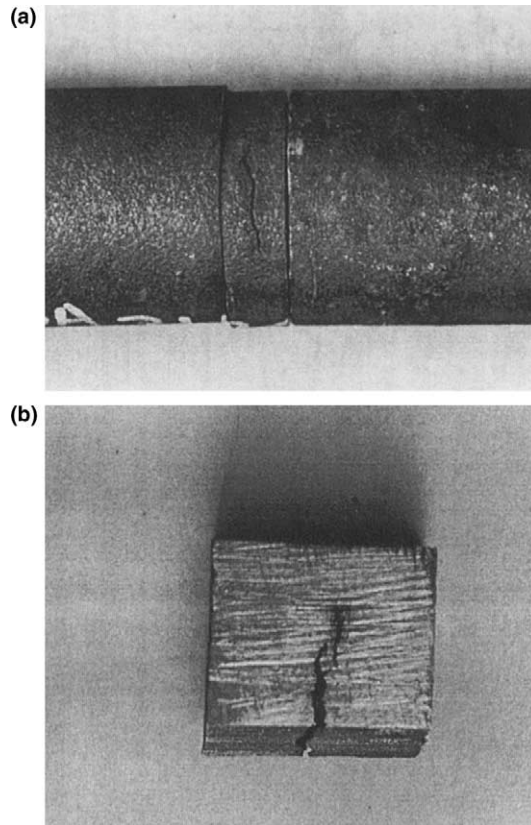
circumferential crack at: (a) outer surface; (b) inner surface.
